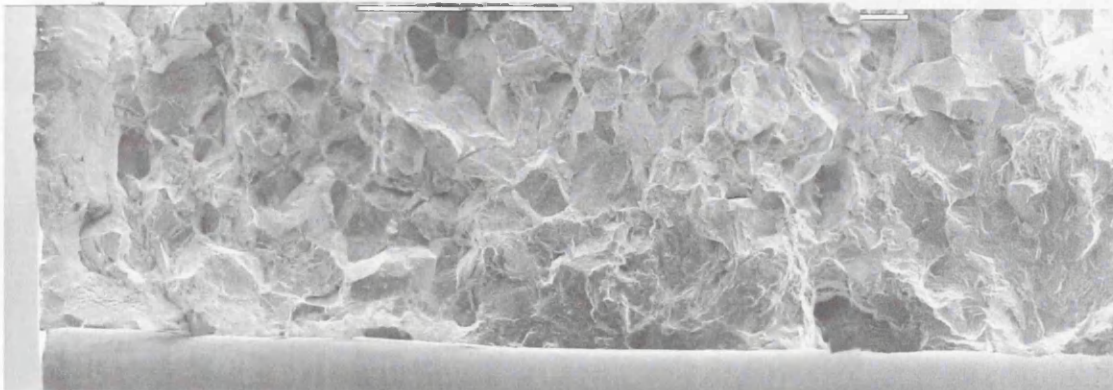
DEN fracture surface (550°C, in vacuum, 2 min dwell), with sub-surface cracking
